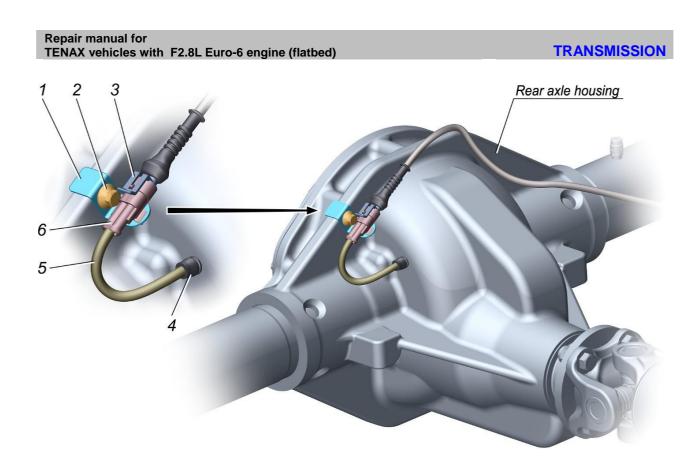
Differential control wiring harness terminal attachment: 1 – bracket; 2 – bolt; 3 – car wiring harness receptacle; 4 – wiring harness seal; 5 – differential solenoid harness; 6 – pin shoe
